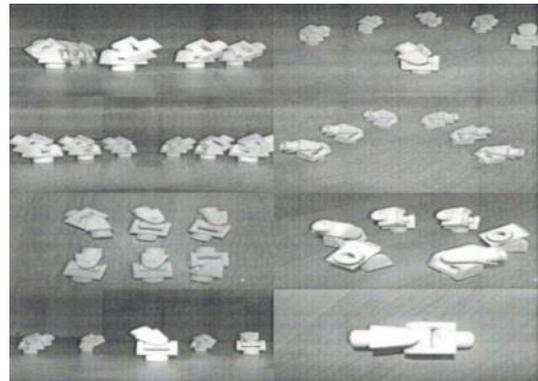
Prototypes of universal Coupling produced using FORMIGA P100, with the material PA2200.
